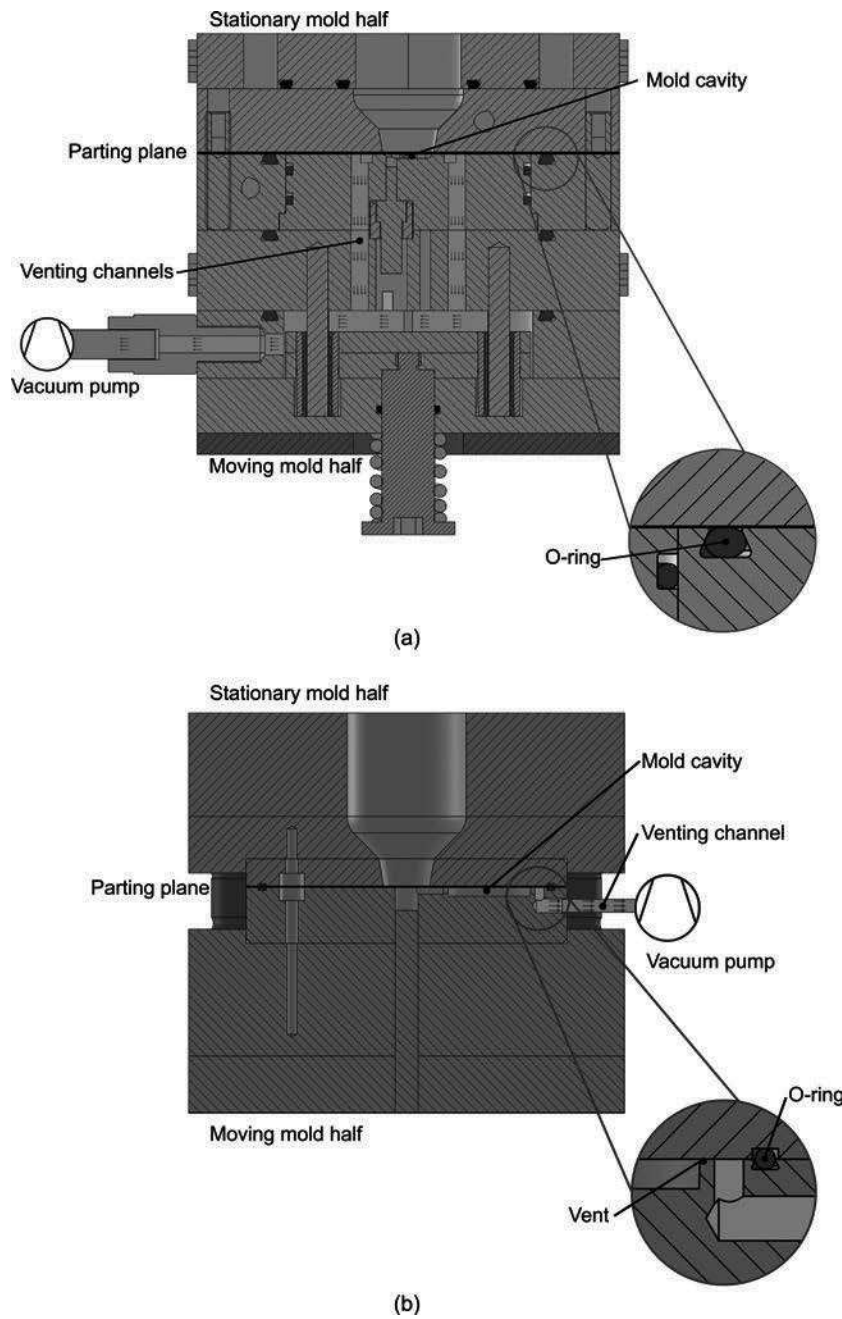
Mold design for vacuum-assisted micro injection molding with venting channels machined (a) in the mold assembly and (b) in the cavity plate. Different solutions for O-ring positioning are also shown
